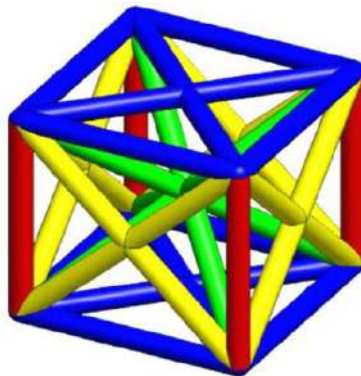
Arrangement of struts in the unit cell: BCC – green, FCC – yellow, vertical struts – red, horizontal struts - blue [26]
